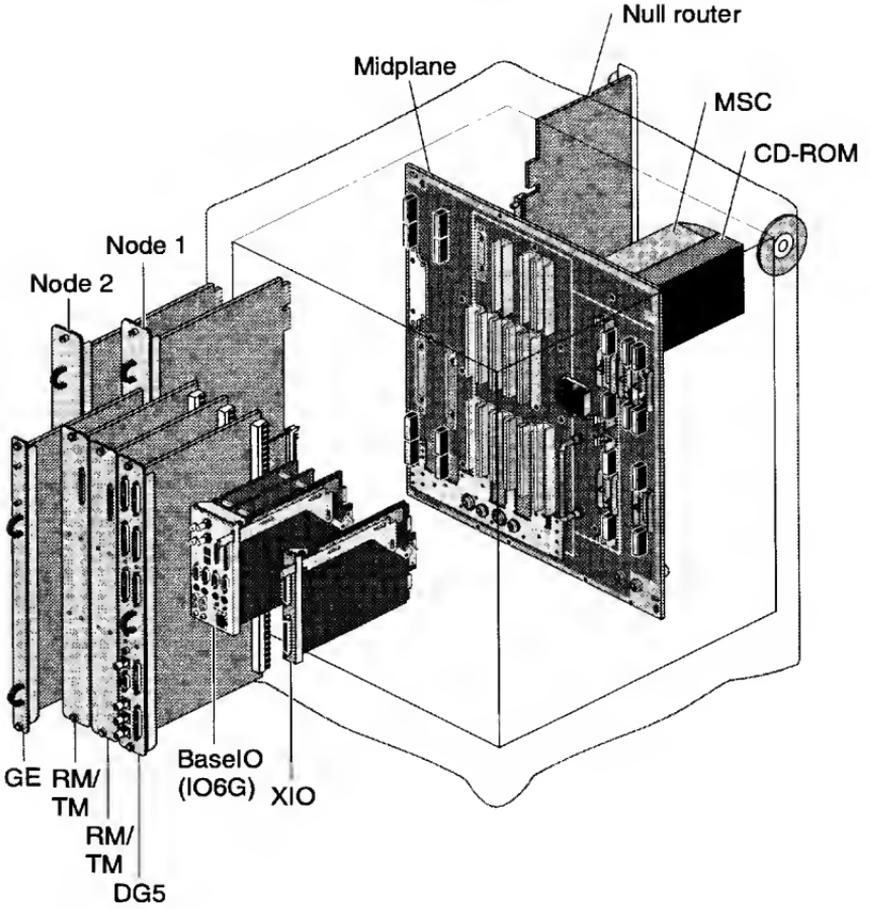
Onyx2 Deskside System Boards and Midplane Exploded View
